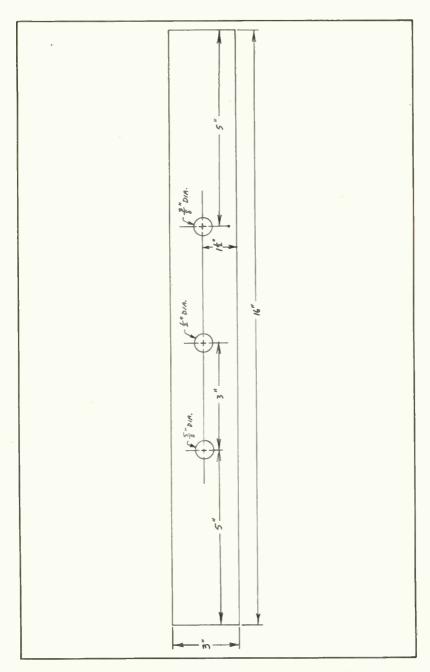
Hole location drawing of the rear apron of the chassis.
